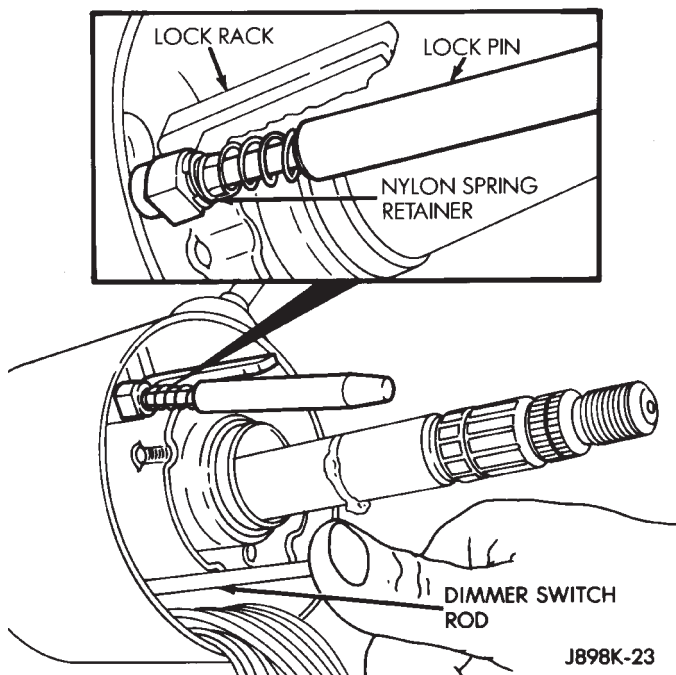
Check Dimmer Switch Rod and Lock Pin
